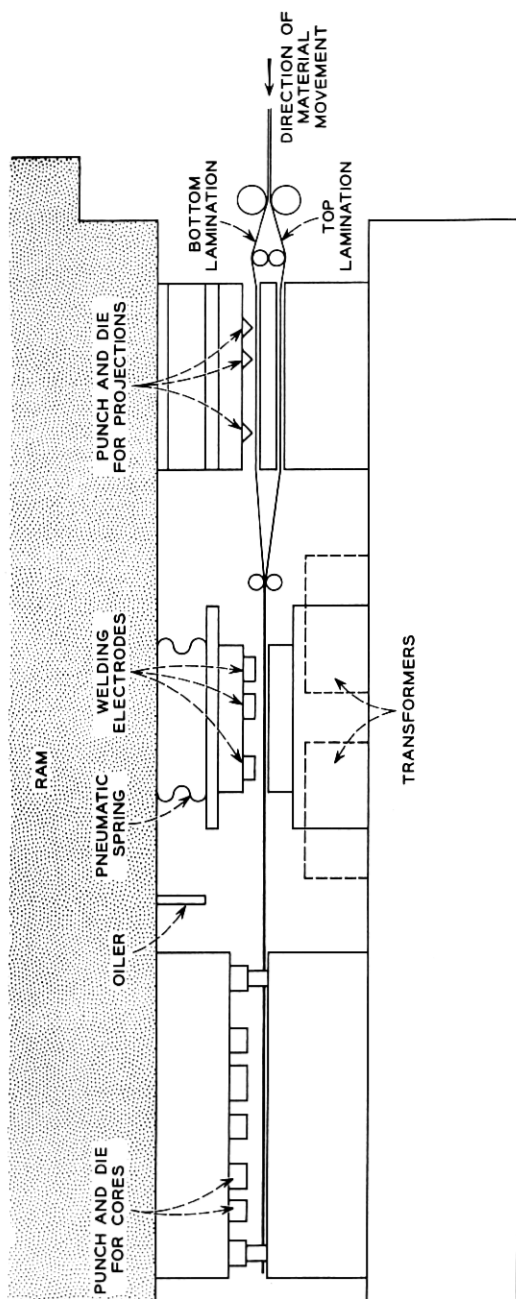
Schematic layout of the proposed process of welding the strip and punching the core.
